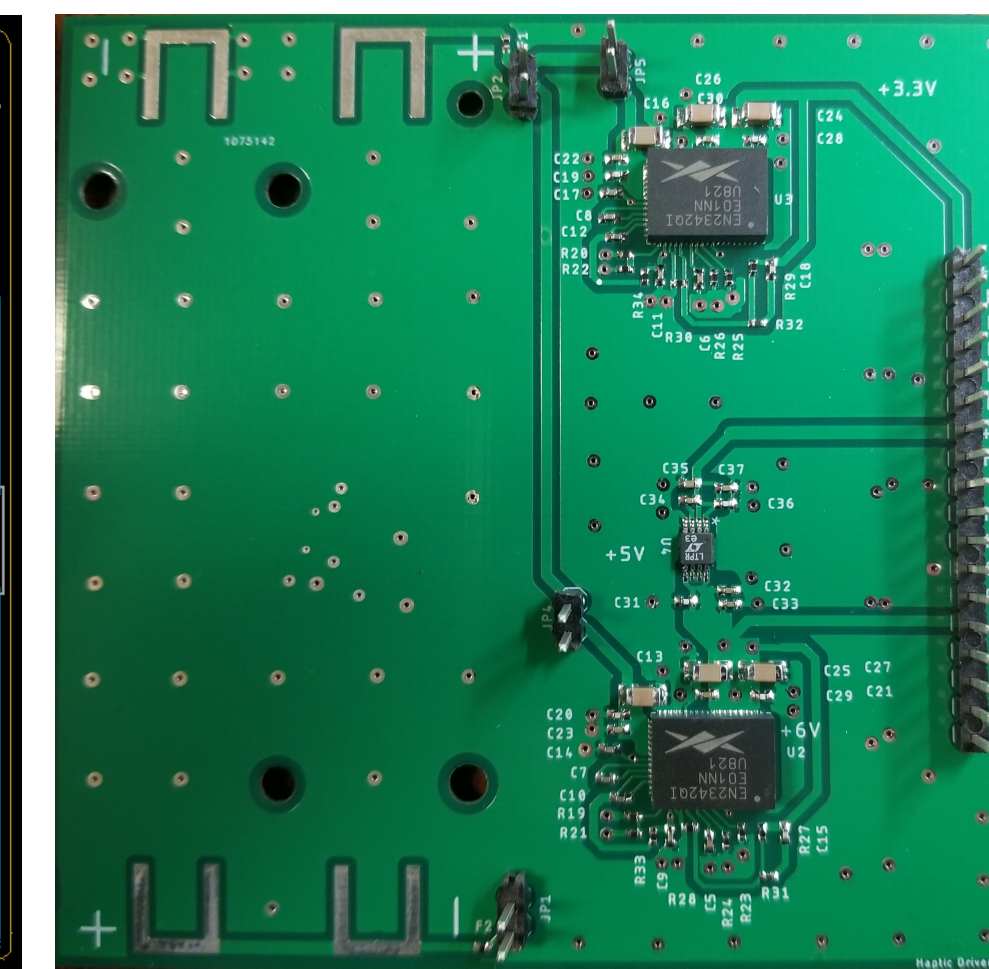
2<sup>nd</sup> PCB Revision with Power and Haptics
